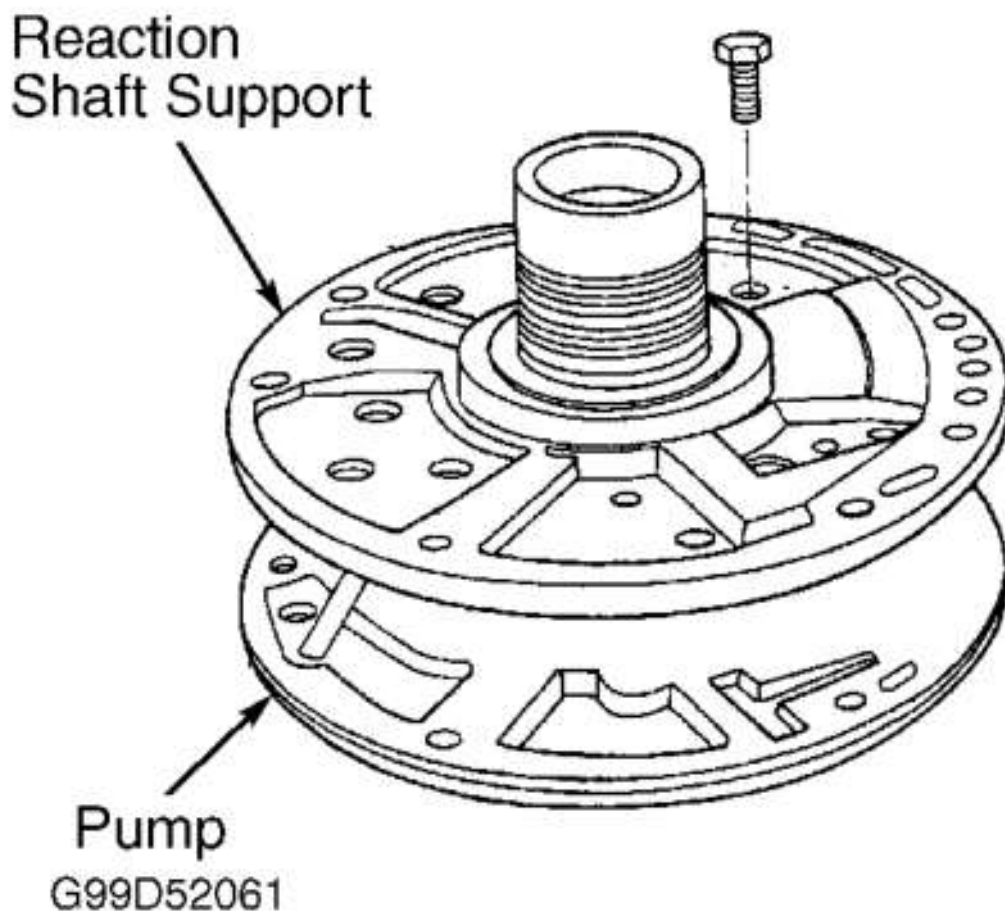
Removing Reaction Shaft Support From Oil Pump Housing
